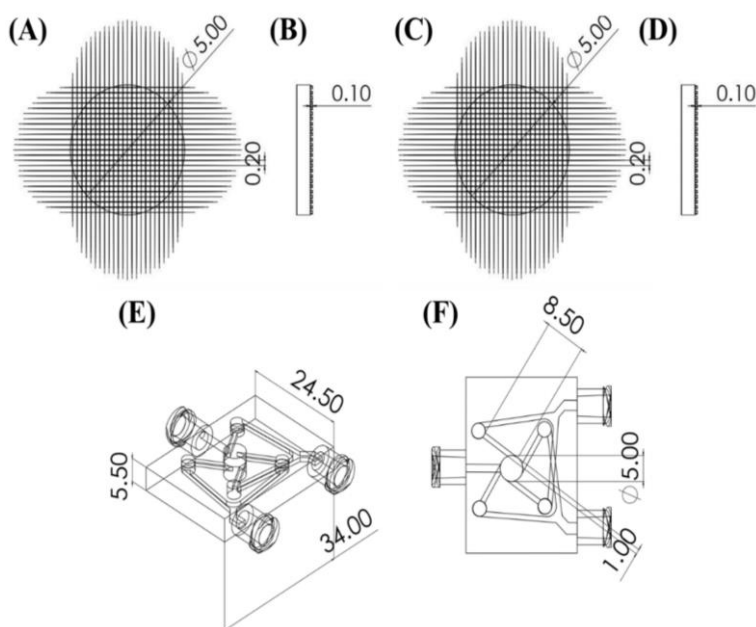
(A) Top view and (B) side view of the 100 μm size patterned surface with marked dimensions; (C) Top view and (D) side view of the 200 μm size patterned surface with marked dimensions; (E) Isometric view and (F) top view of the microfluidic mixer device with open top and bottom side with marked dimensions.
